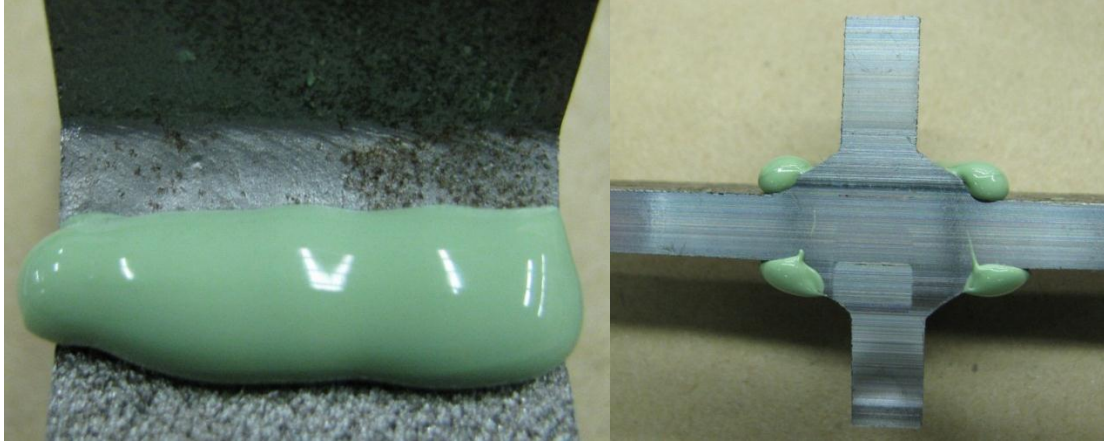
Impression on a typical weld toe: top (left) and side view (right)
